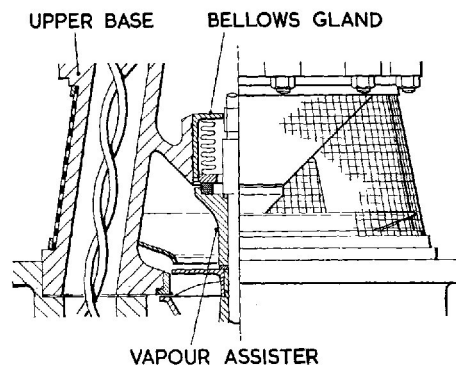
Gland arrangement—B.P.3 Mk. 3 fuel pump
